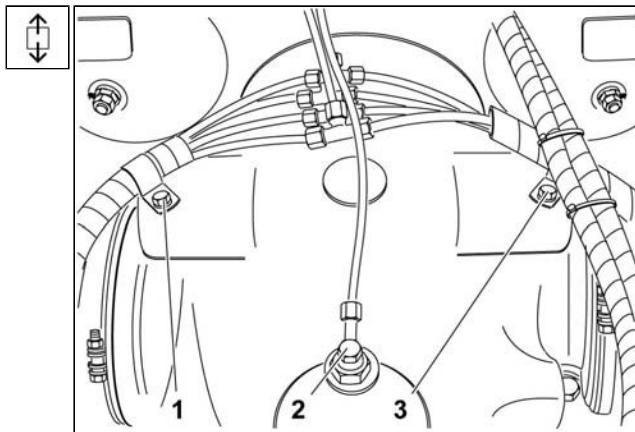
Removal of bleeding manifold and attachment of air pipes
